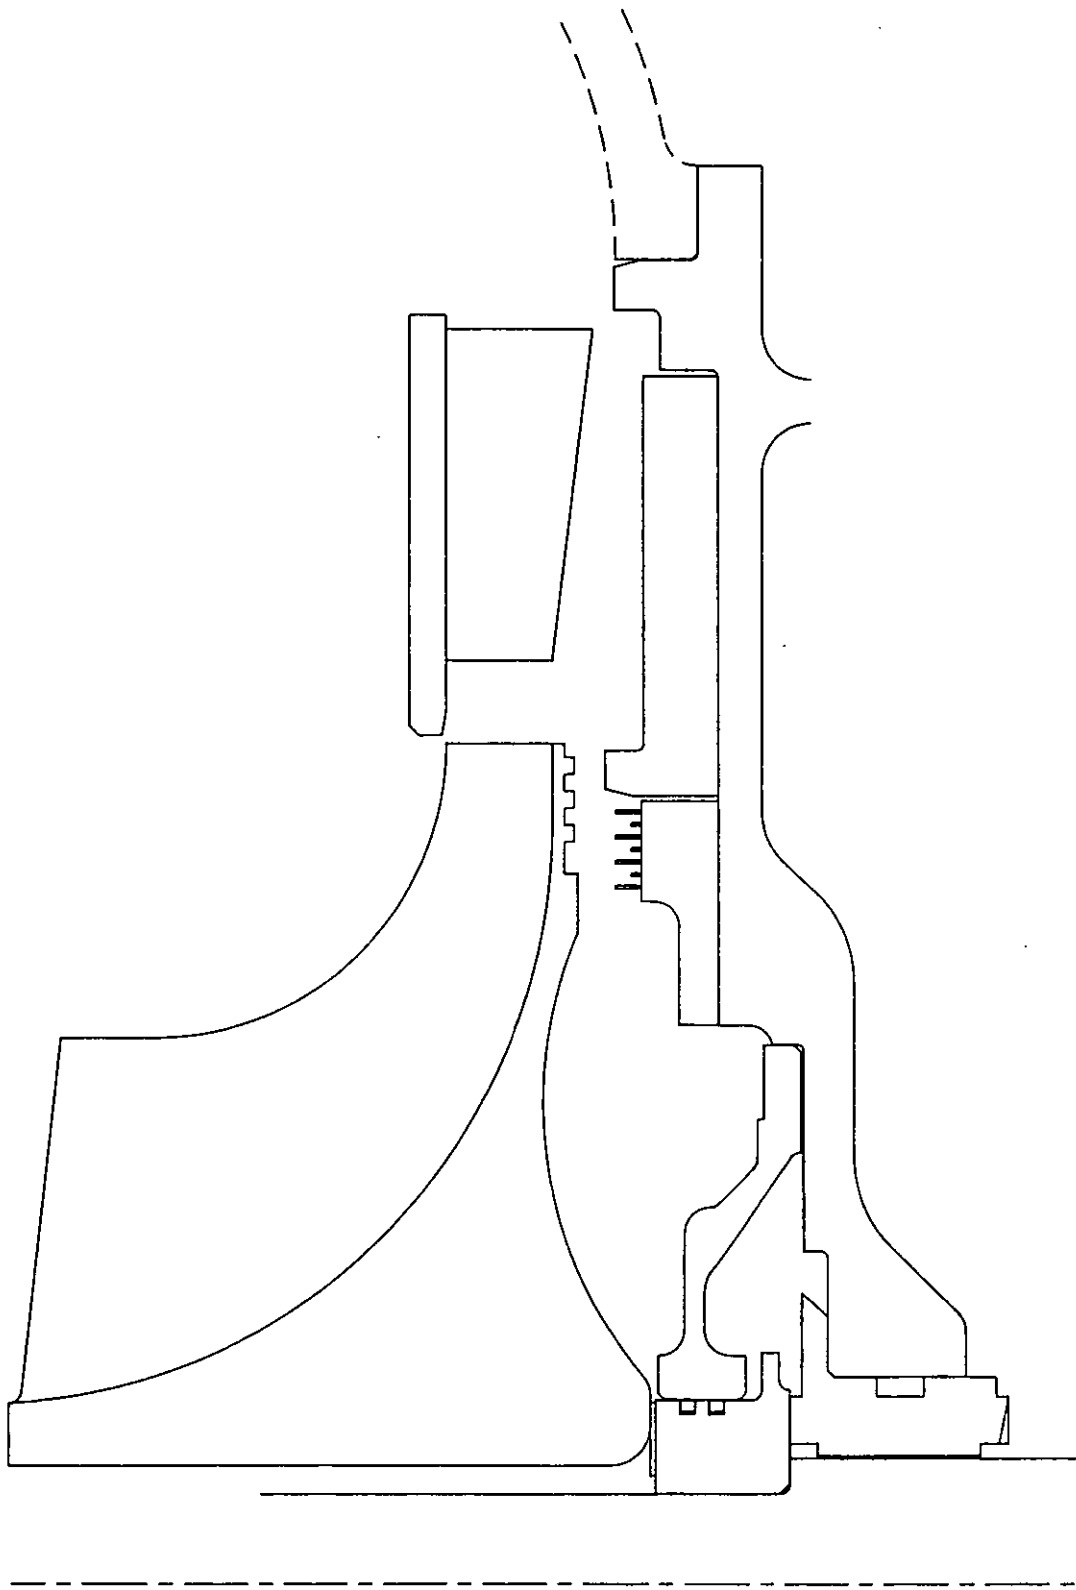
Scheme with reversed diffuser and recessed bearing
